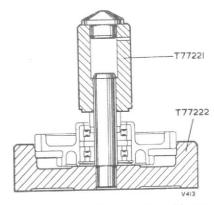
Pressing the inner spacer and inner race of the lower roller bearing into the small end of the gear
